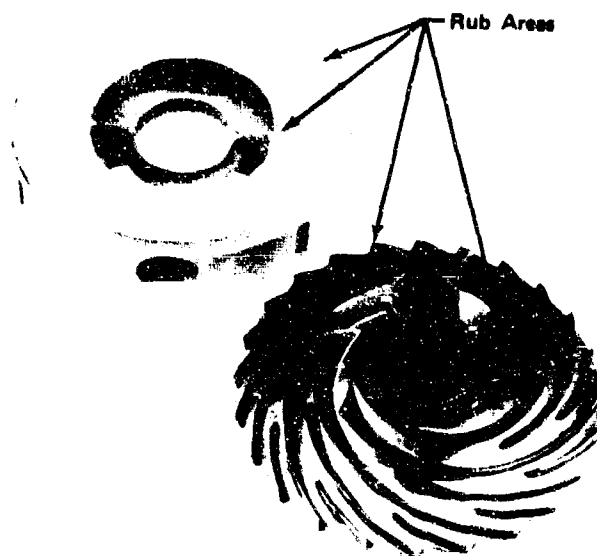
F35138-2 Post-Test View Showing Moderate Rub Indications on 2nd-Stage Impeller and Pumping Shroud
